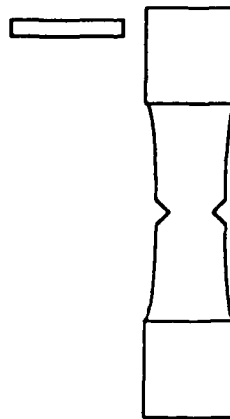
Schematic diagrams of specimens used to investigate the fracture process.
